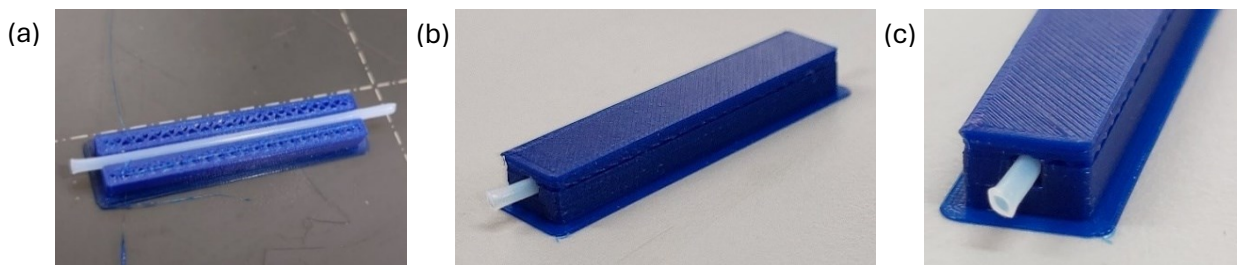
printed specimen, during the print pause (a), after printing (b) e close-up (c)
